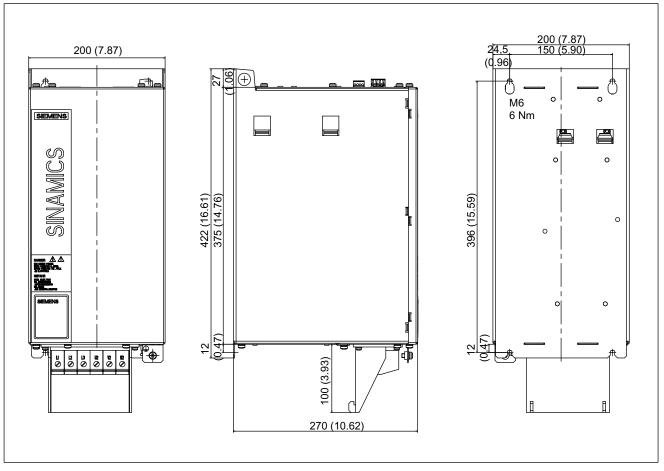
Dimension drawing of Active Interface Module 55 kW, all dimensions in mm and (inches)
